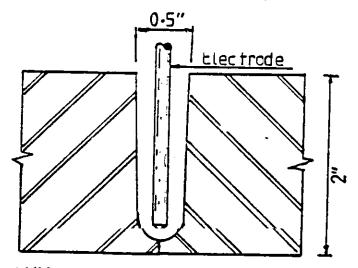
(b): TYPICAL NARROW GAP WELD PREPARATION
